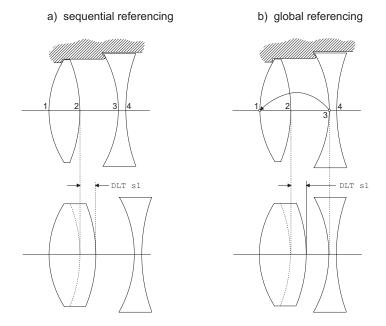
Axial thickness tolerance for different types of surface referencing.
